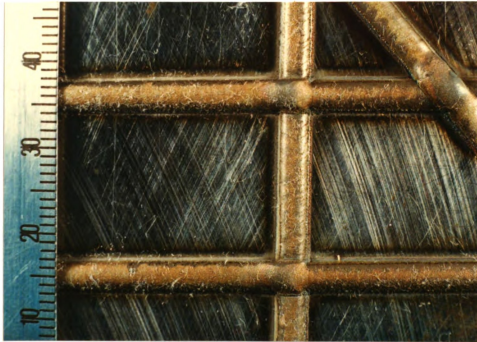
A view of intersecting hard-facing tracks, with smooth surfaces, uniform cladding thickness, and width, deposited on a AISI 1045 steel flat plate.
